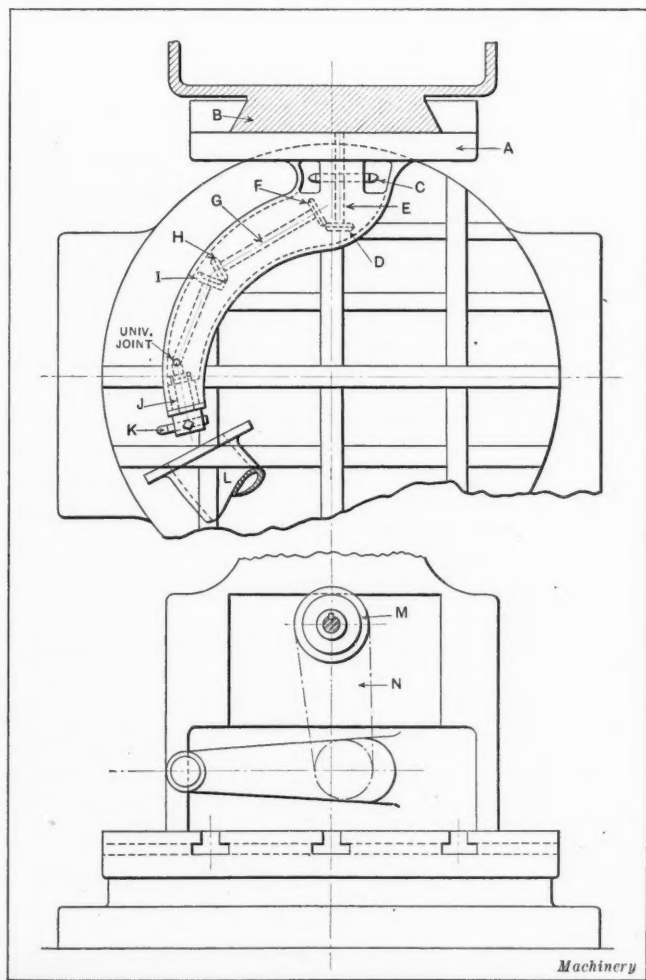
Design of Special Boring-bar for machining Piece shown in Fig. 3
